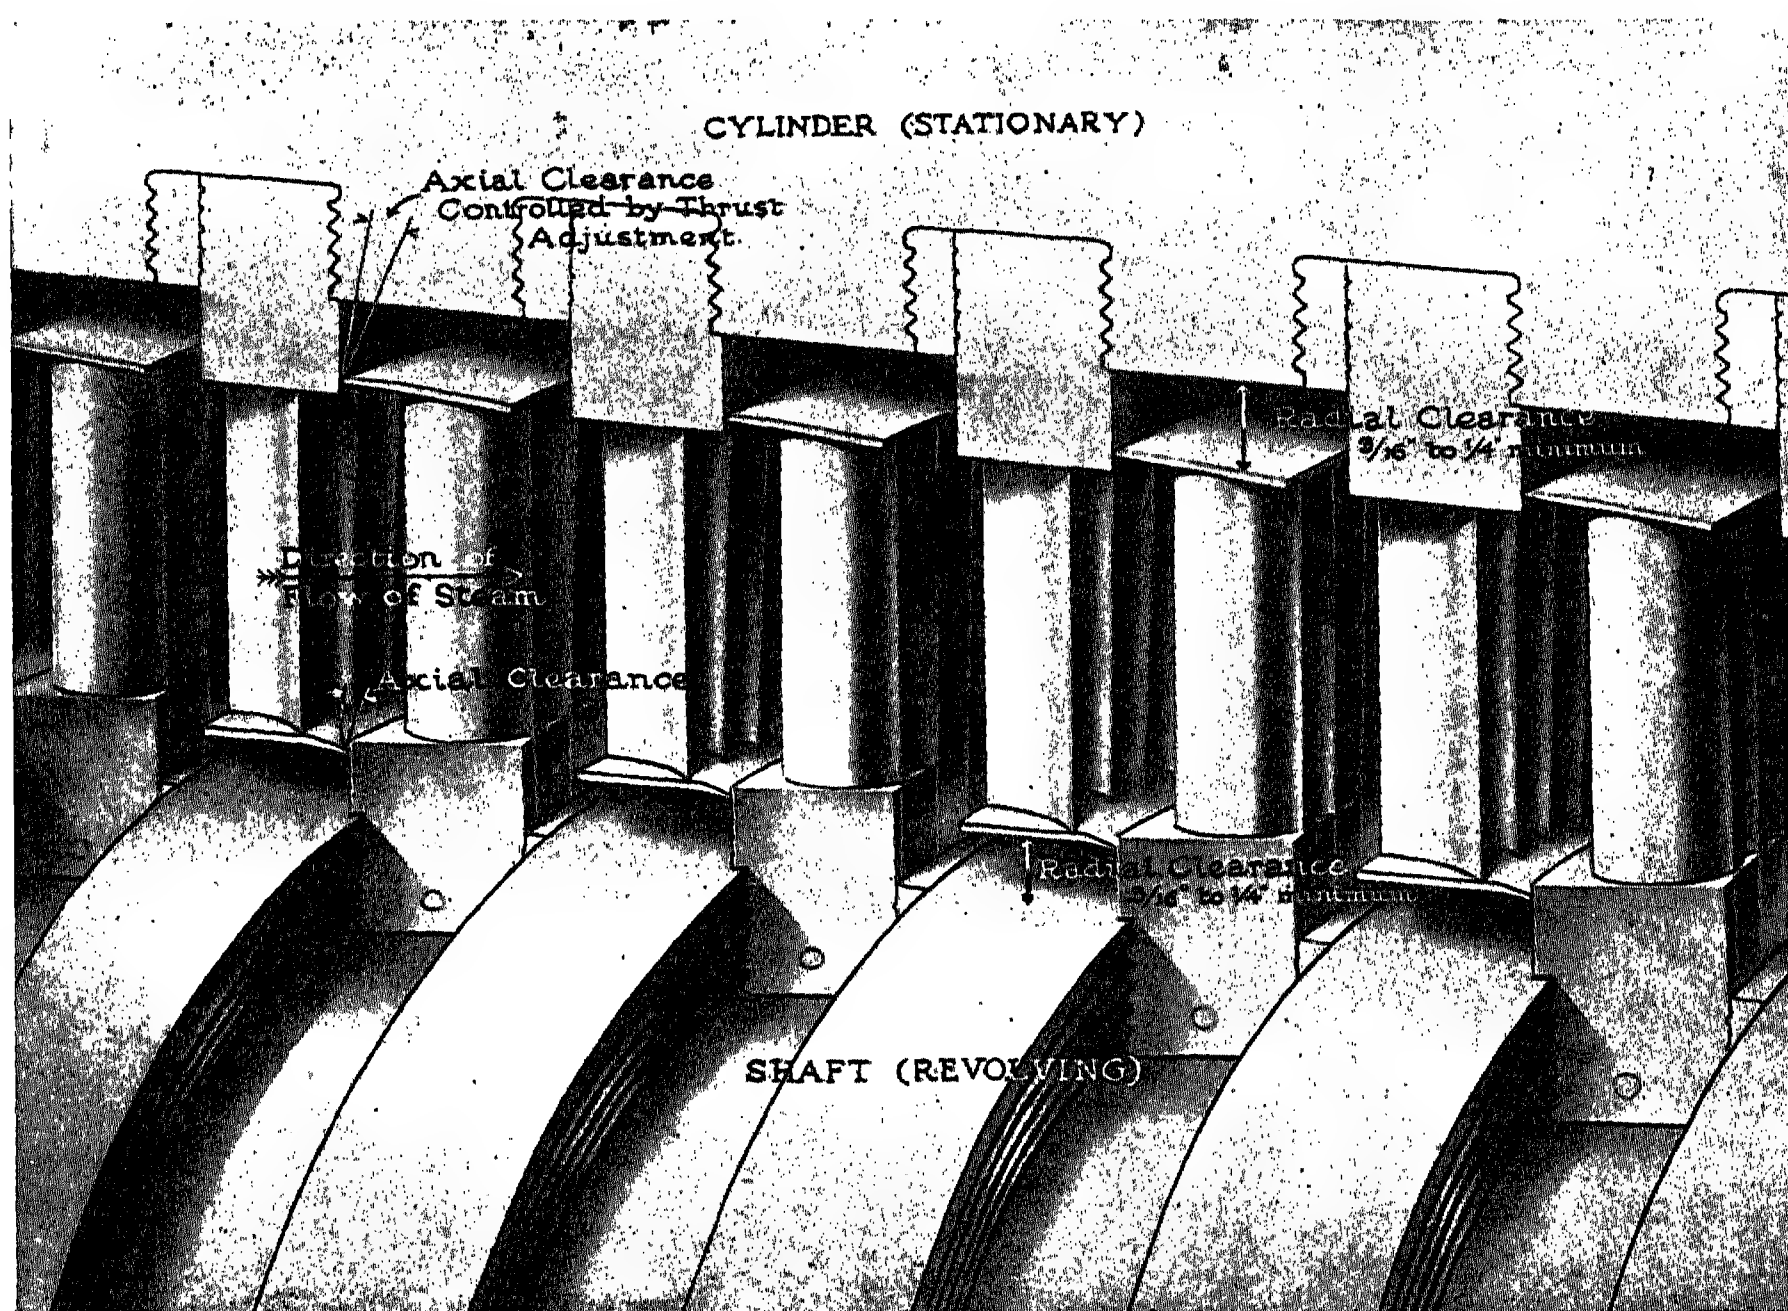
Parsons "End-tightened" Blading in Cylinder and Shaft, showing large Radial and Axial Clearance
